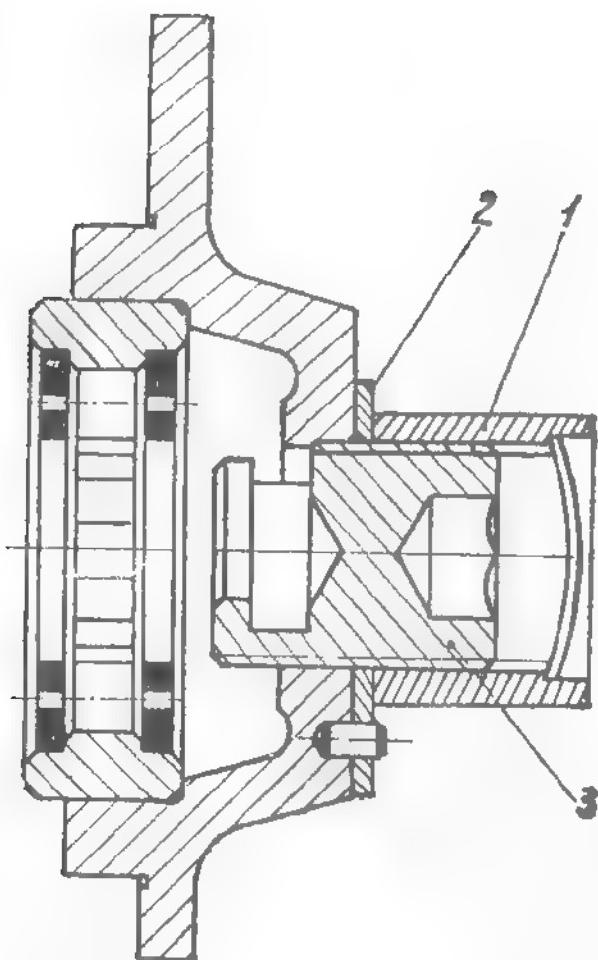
47. STEERING WHEEL ANGULAR PLAY ADJUSTING SYSTEM.
